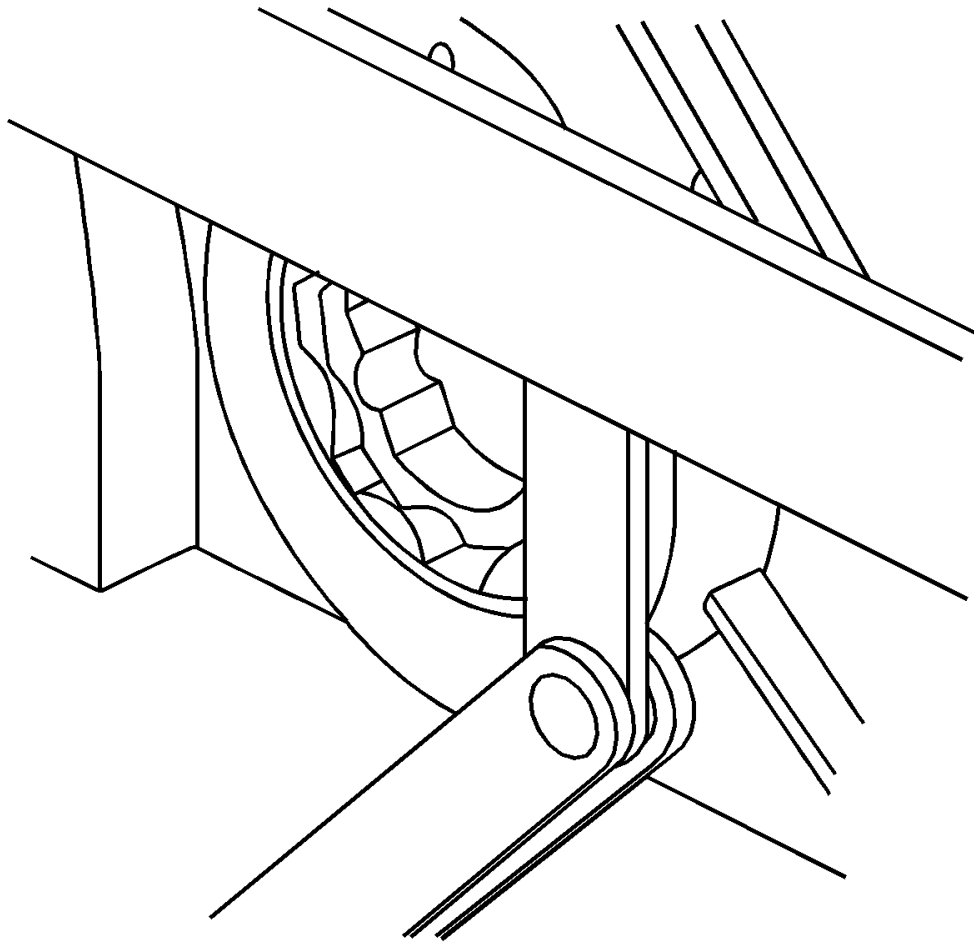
Measuring Engine Oil Pump Axial Clearance Of Rotors
